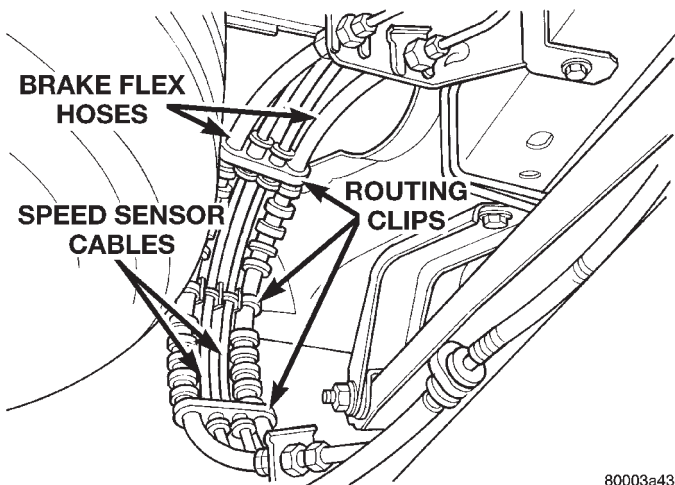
Speed Sensor Cable Attachment To Brake Flex Hose
